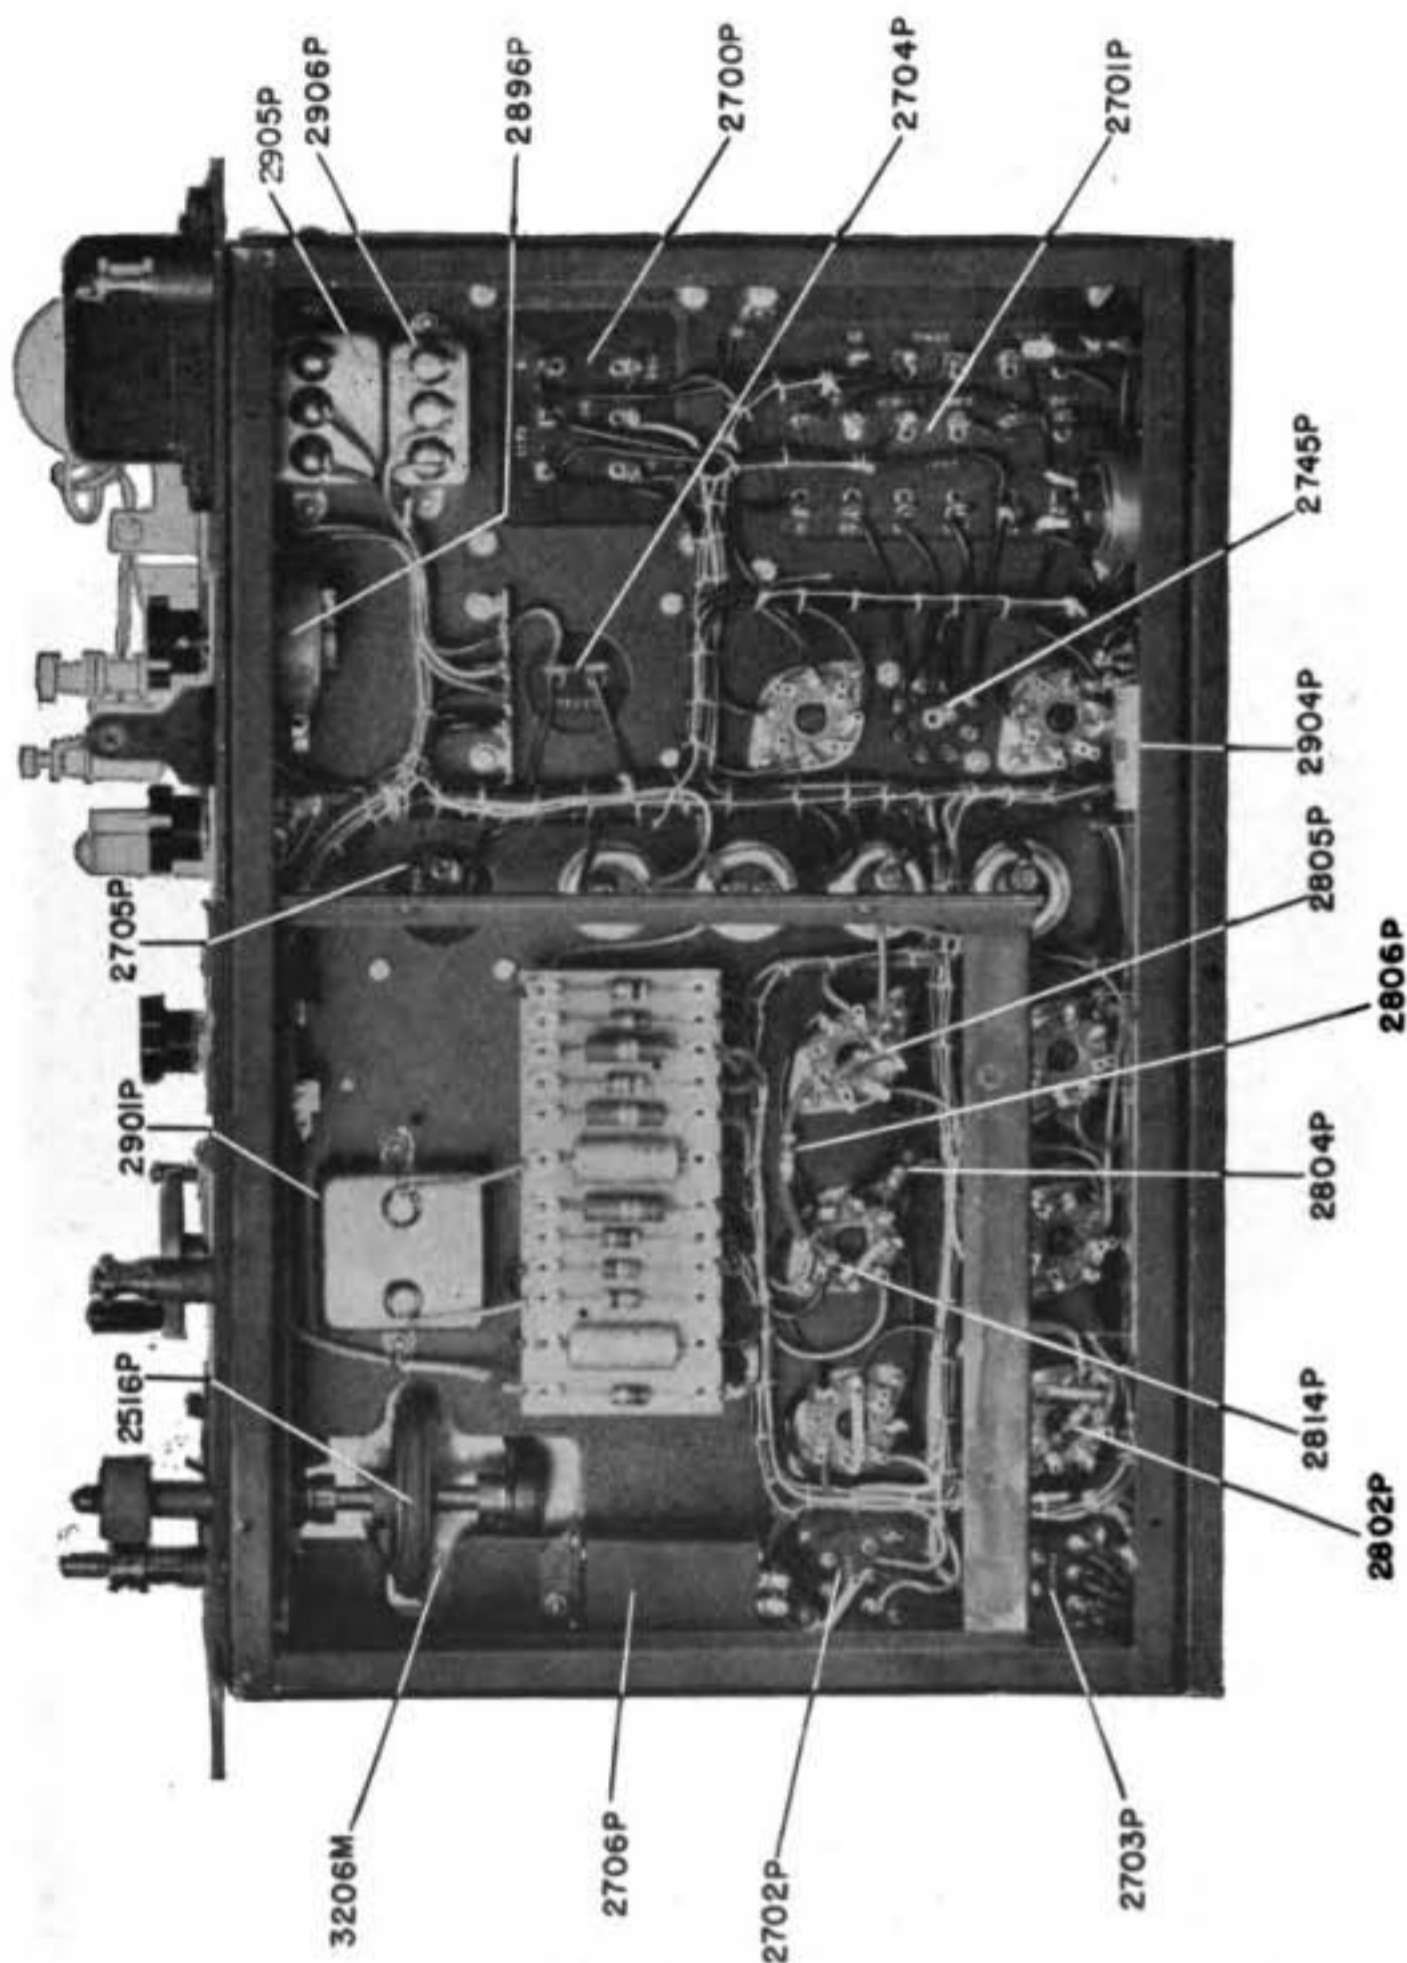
Recorder BC-1016, Chassis—Bottom View With Plate Removed
